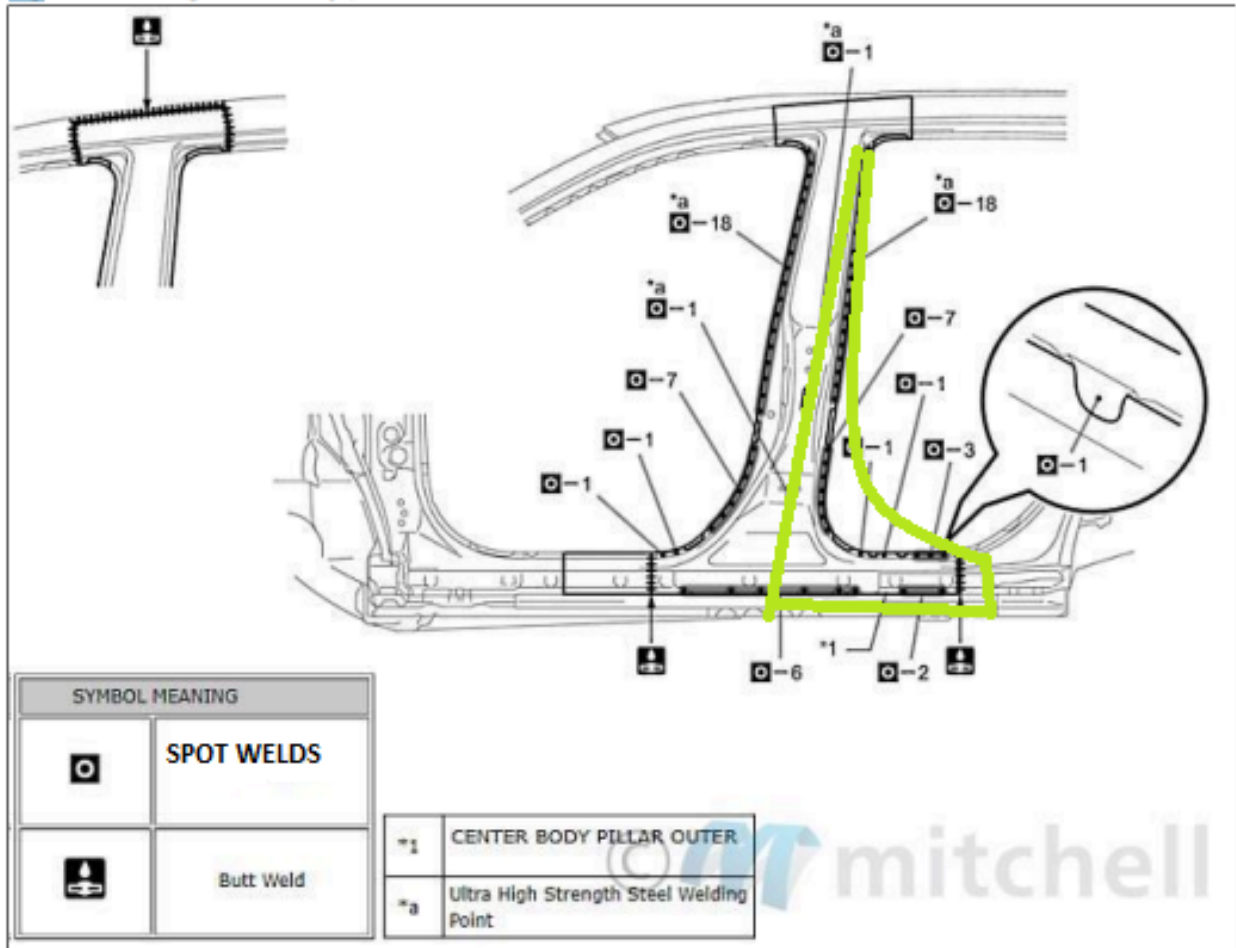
Installing center body pillar – continued	Fig. 13 : Installer le pied milieu – suite
